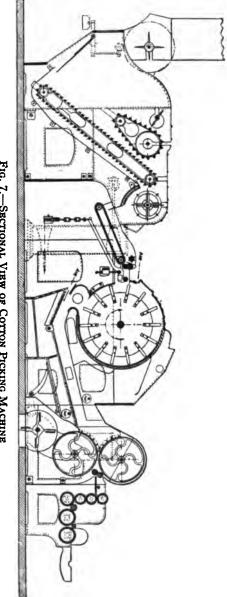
SECTIONAL VIEW OF COTTON PICKING MACHINE
